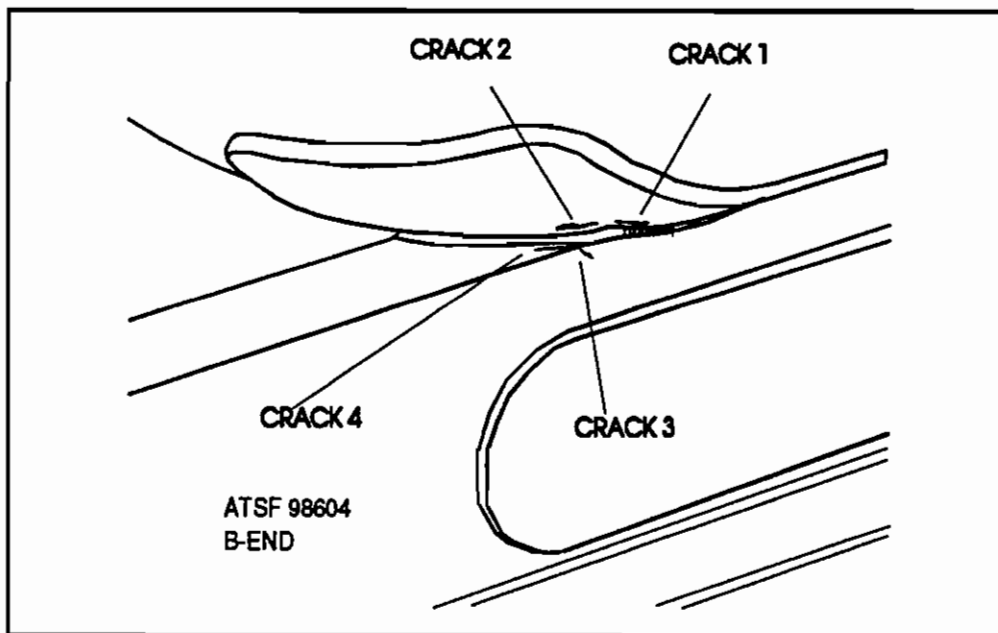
B-end, Right Side Cracks at Head Pad to Sill Connection
